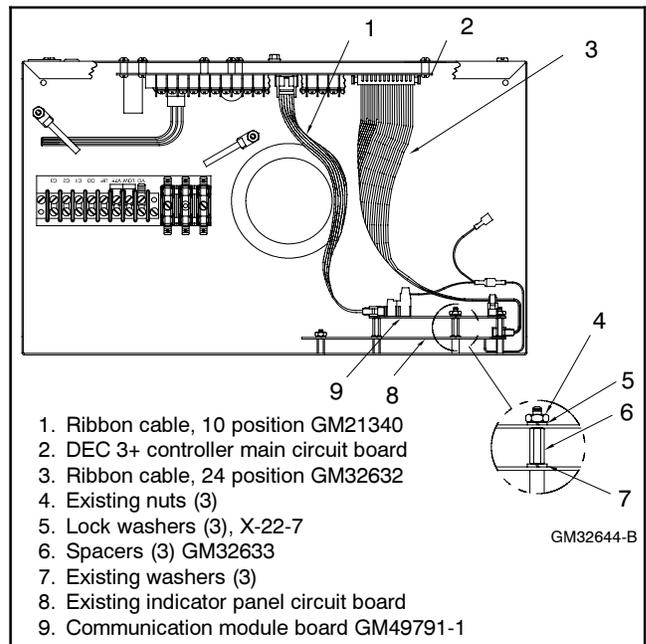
Mounting Communication Module Board in the DEC 3+ Controller
